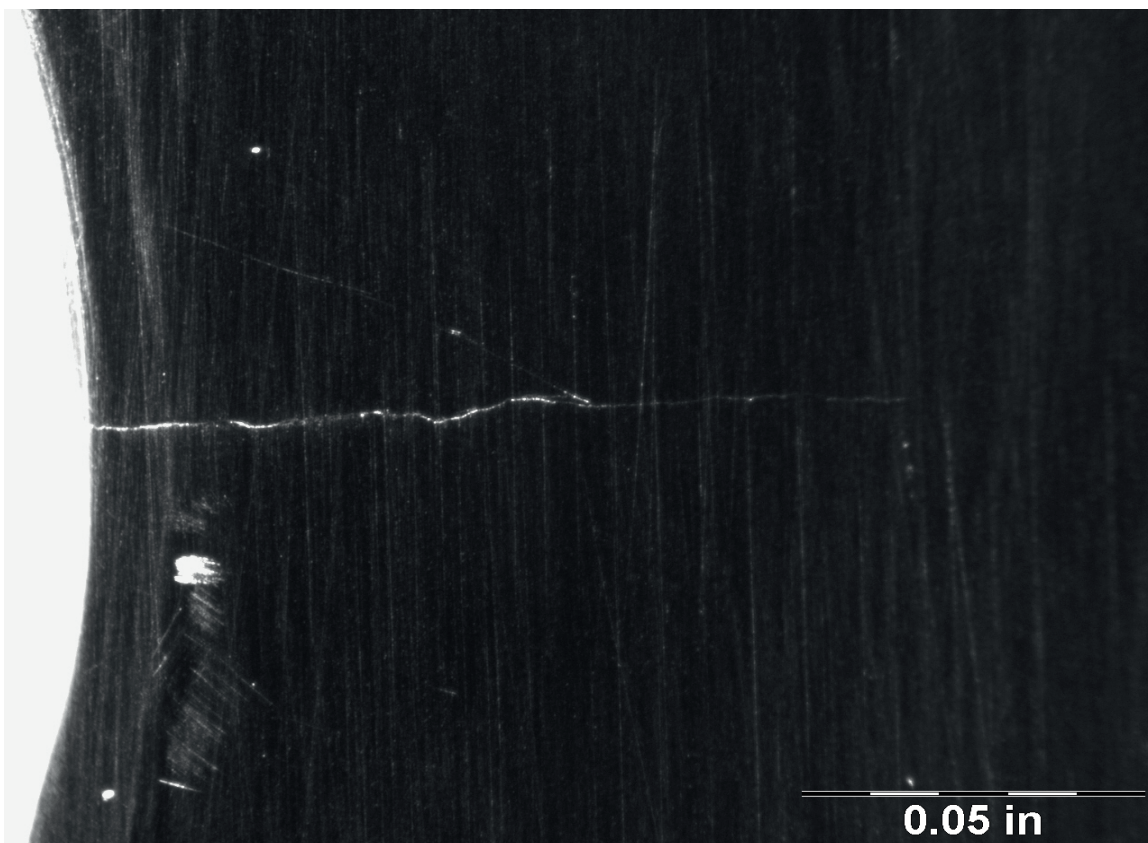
Image of Surface Crack in Coupon Cx4N1-05-D, Surface Crack Length is 0.1253 inch.
